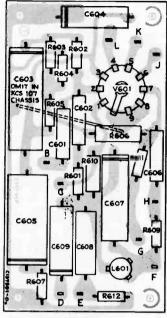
PW600—Horizontal Oscillator Assembly Layout
